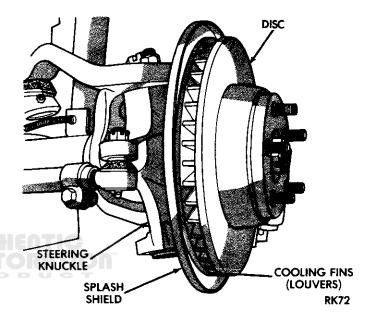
Chrysler Disc Brake Caliper Mounting—Front View
